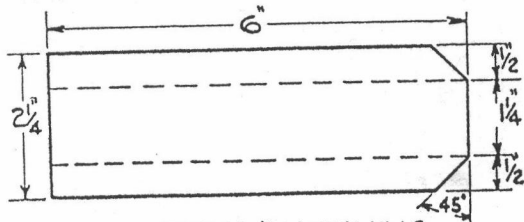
CUTTING & NOTCHING DRIVE CLEATS
